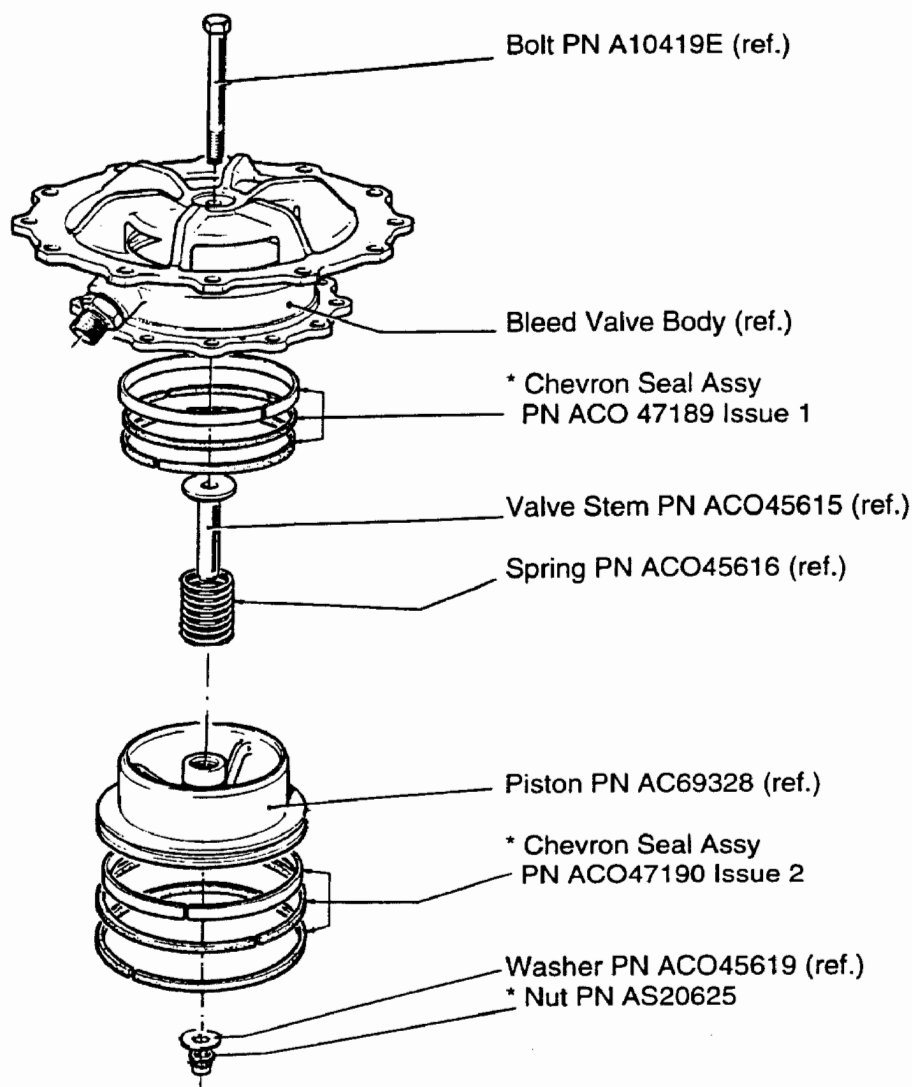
Exploded View of Bleed Valve P/N AC69924 Mod 2
